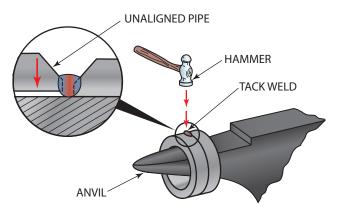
Hitting a hot tack weld can align a pipe joint.
